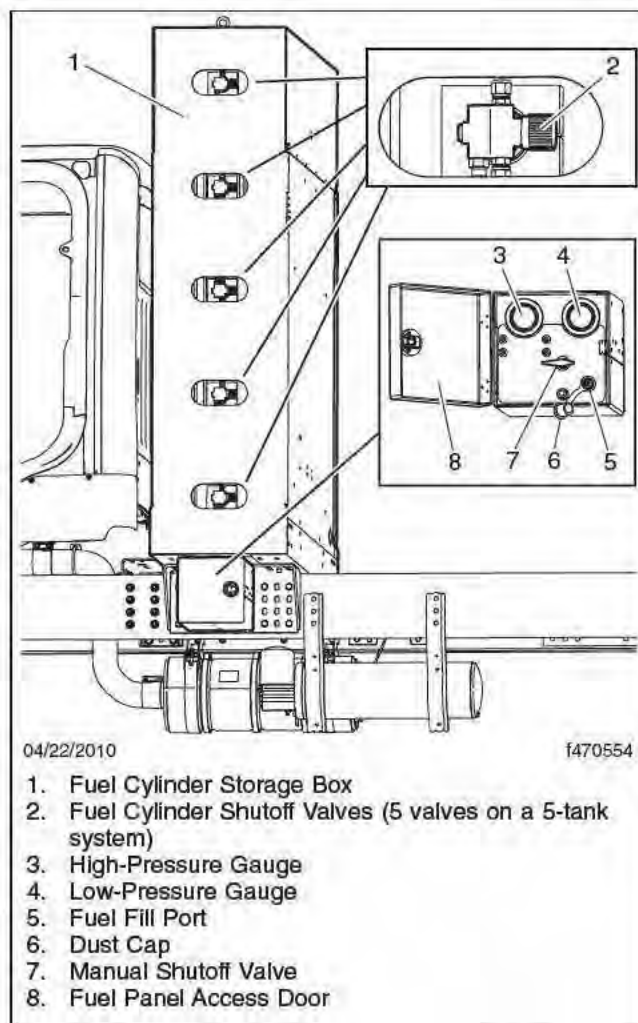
, CNG Fuel Cylinder Storage Box (5-cylinder system shown)
